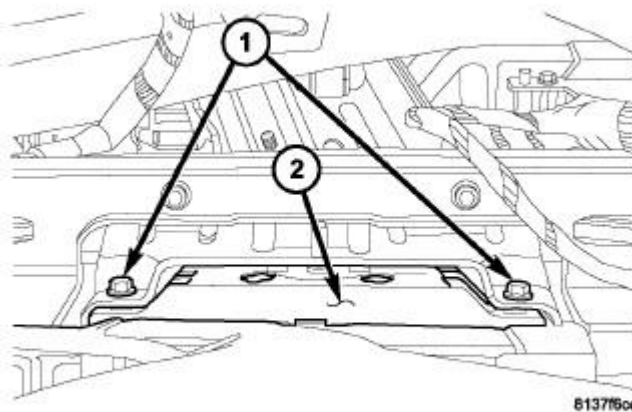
UPPER COLUMN MOUNTING BOLTS
